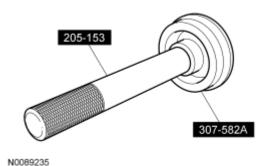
Axle Seal Installer & Handle Courtesy of FORD MOTOR CO.
